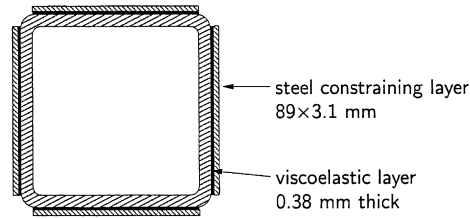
Cross-section of the connecting tube with constrained viscoelastic layers.
